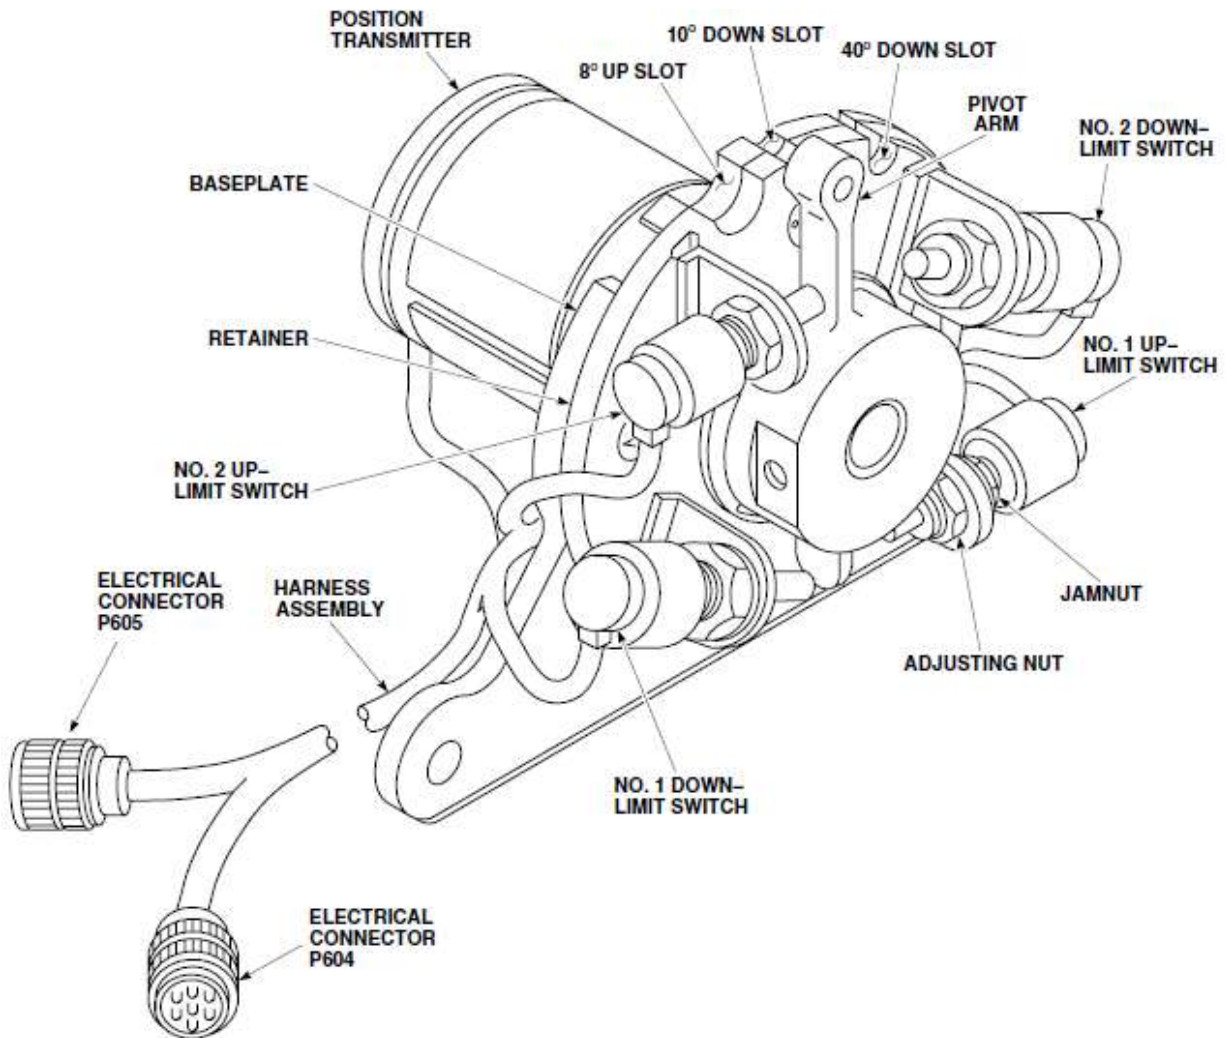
Position Transmitter/Limit Switch Assembly
